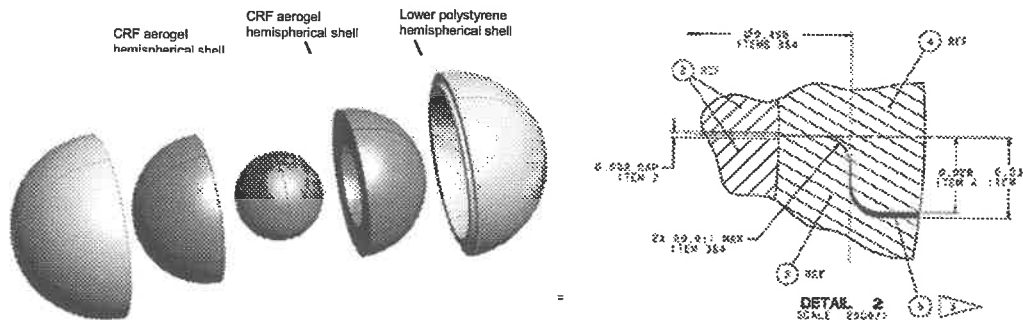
and 1b. Exploded view of the double shell target, a joint detail.
